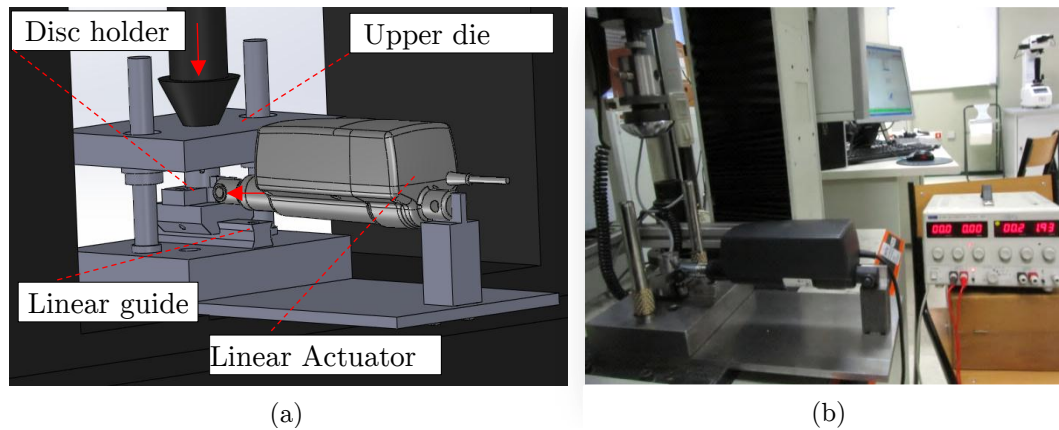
General scheme of the modification device. Surface modification device CAD design (a) and final assembly (b).
